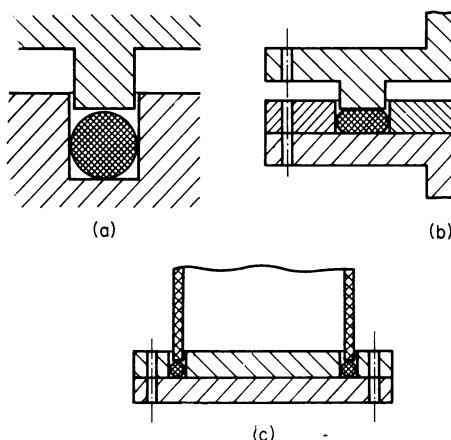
Grooves with rectangular cross section, for O-ring seals (unlimited compression): (a) closed groove; (b) demountable groove; (c) as (b) for pipe edge seal
